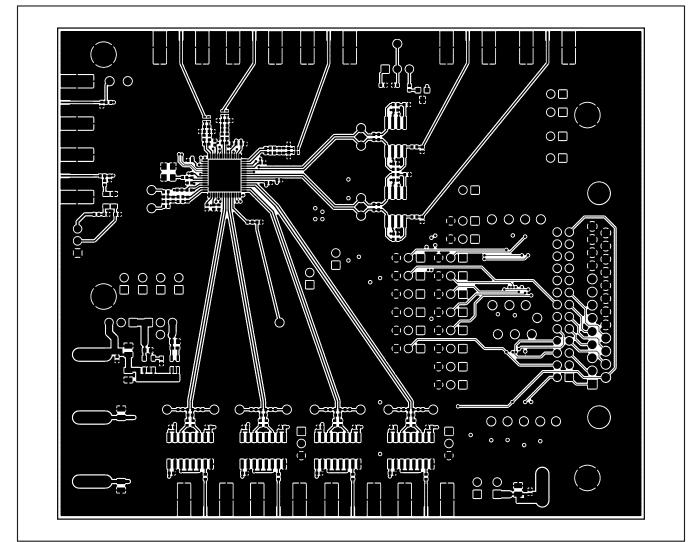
MAX2839 EV Kit PCB Layout—Component Side
